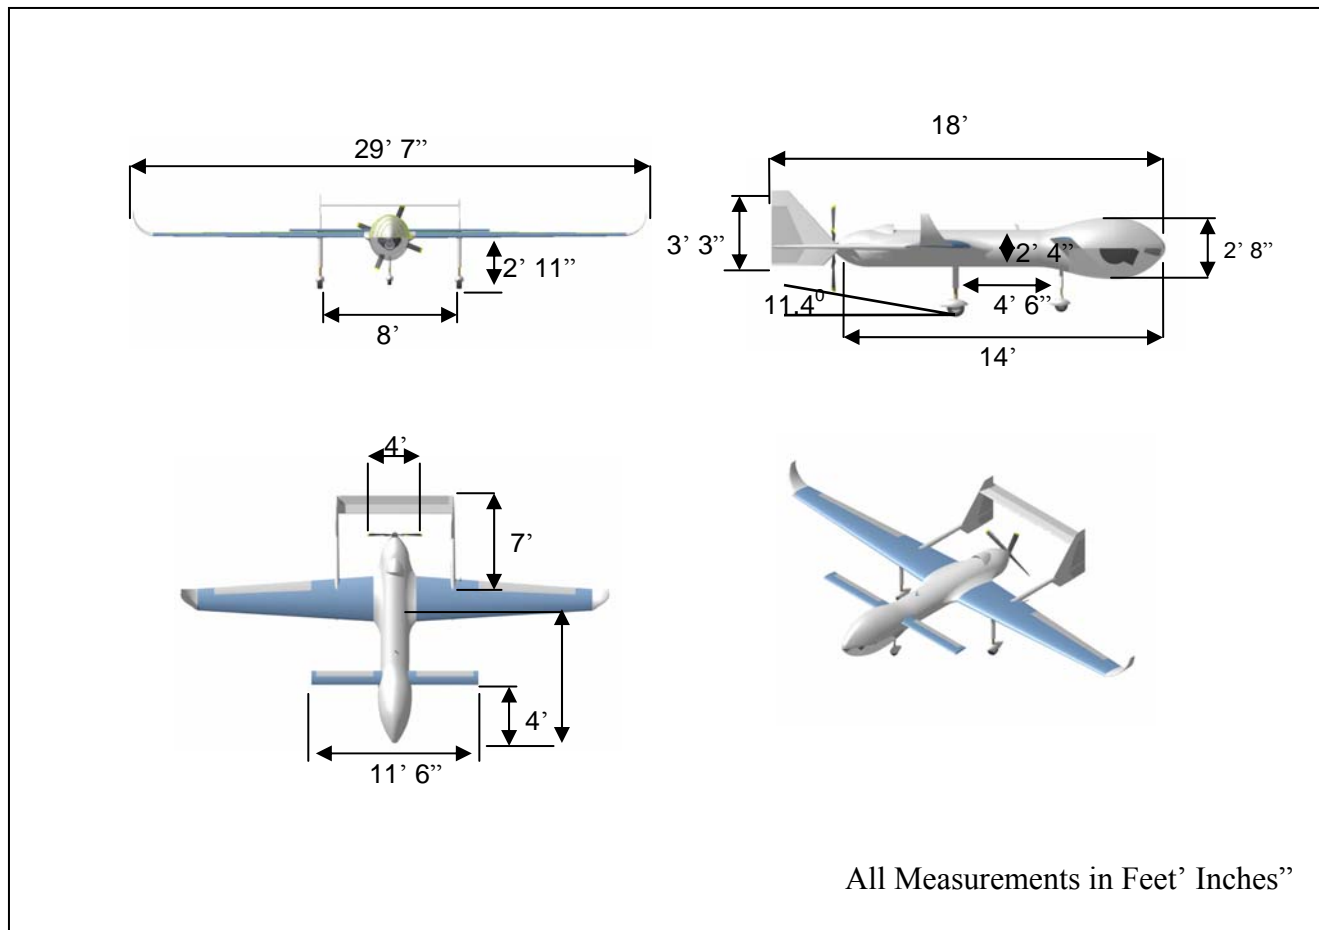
Dimensioned 3 view of the Metro-Scout
